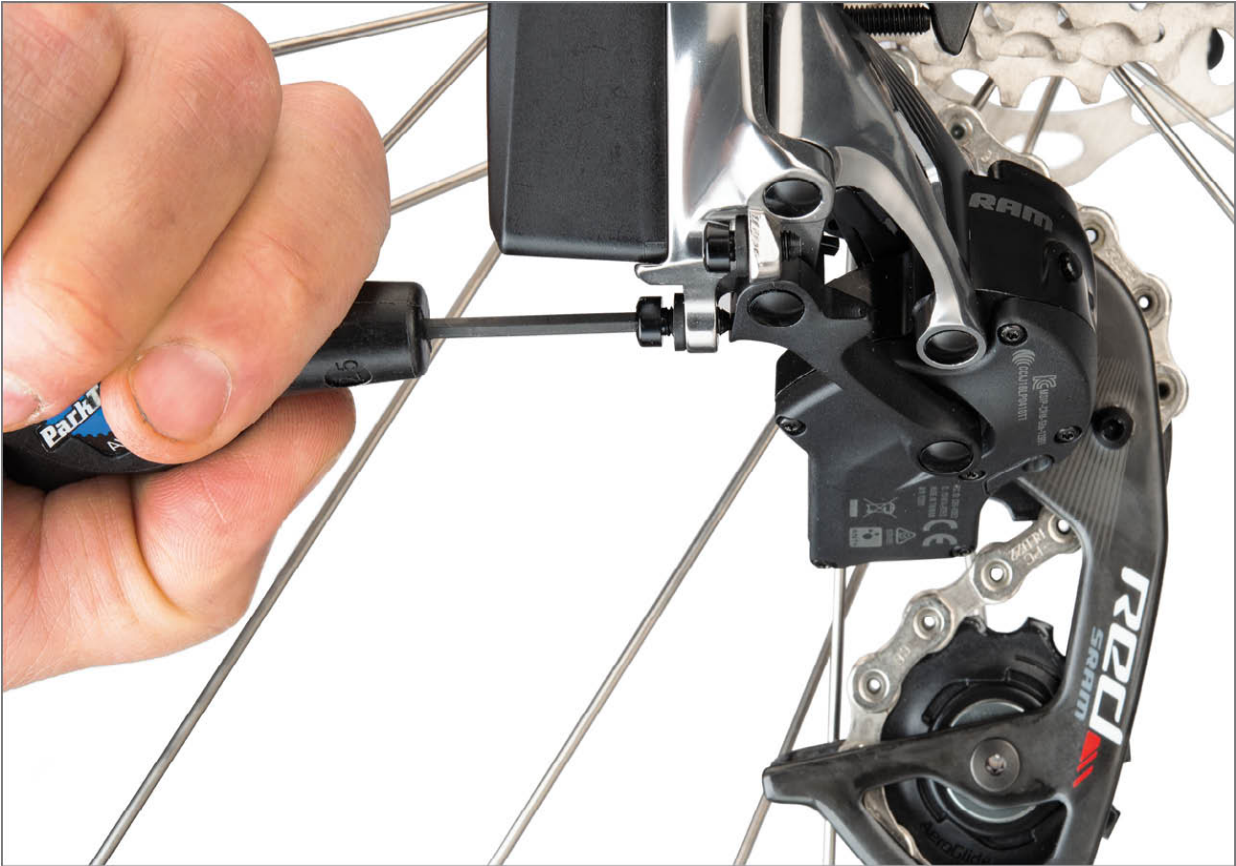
Tighten the L-limit screw while on the largest cog
